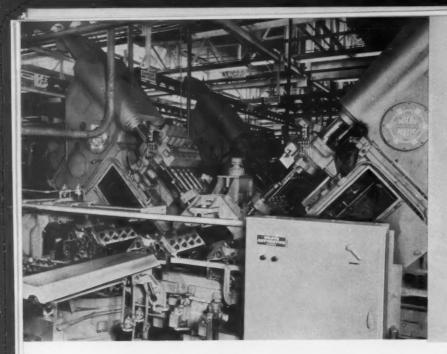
Hydraulically operated, duplex, eight-spindle honing machines are employed to rough and finish the cylinder bores in the engine blocks.
